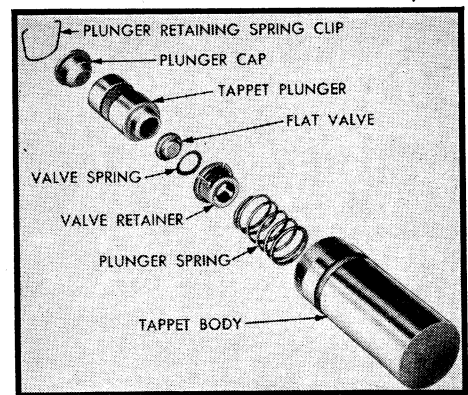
Hydraulic valve lifter of the flat valve type. V8 engines
